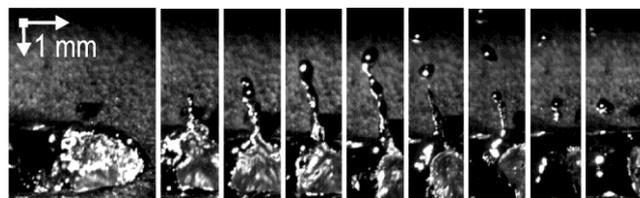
High-speed imaging sequence of droplets being ejected from a weld pool [5]
